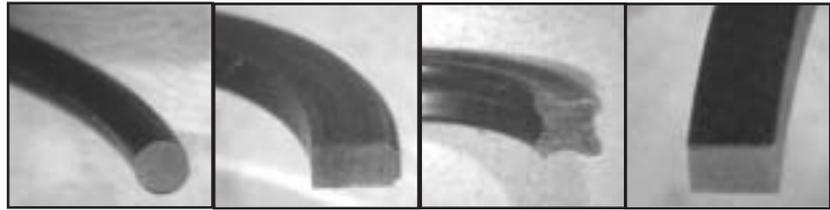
Various transmission seal designs. Pictured left to right: O-ring seal, D-ring seal, Quad seal and the Lathe cut seal.
